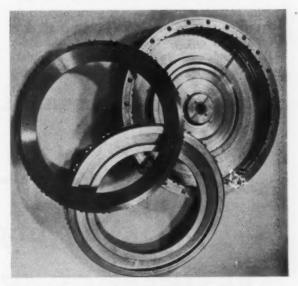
The gear teeth on these three parts for a Packard transmission are cut on two Shear-Speed gear generating machines. This is believed to be the first time this type of machine has been used for cutting internal gears.
